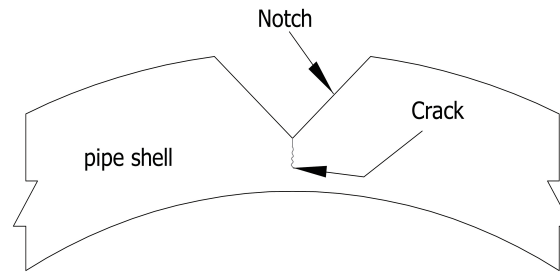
Sketch of crack at a notch tip on a metallic pipe.
